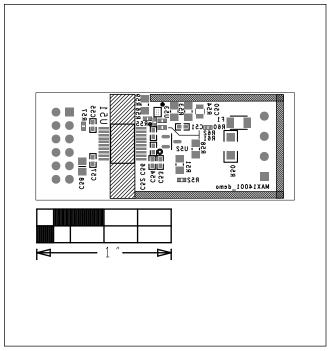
MAX14001PMB PCB Layout—Silkscreen Bottom
